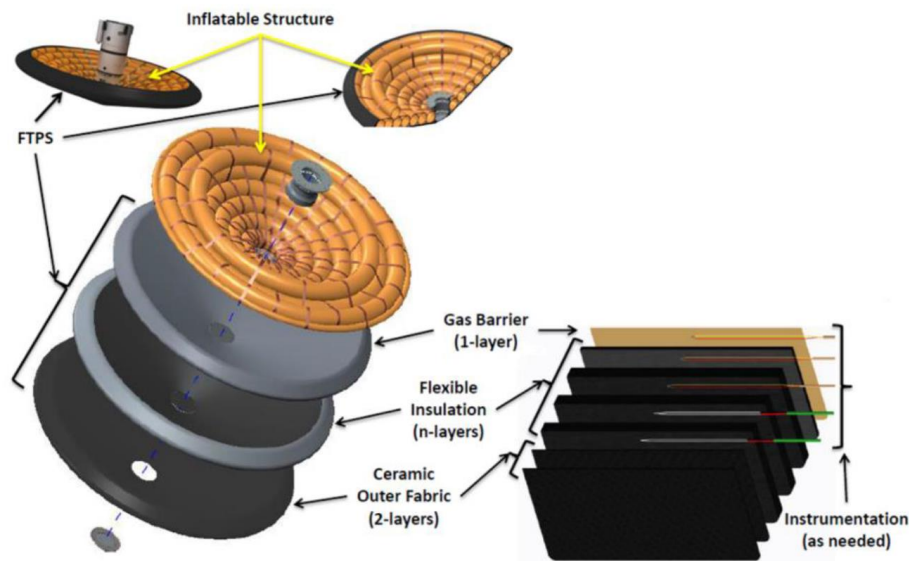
HIAD Exploded View of FTPS and TC Instrumentation [62]
